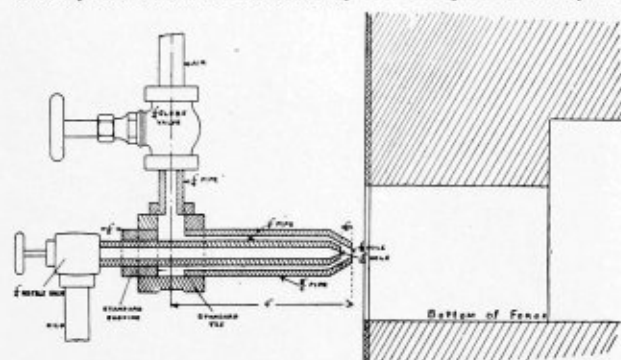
SECTIONAL VIEW OF AN EASILY MADE OIL BURNER.
